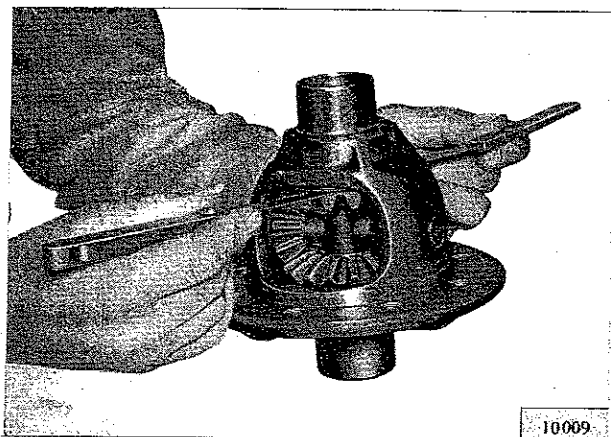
CHECKING SIDE GEAR CLEARANCE
